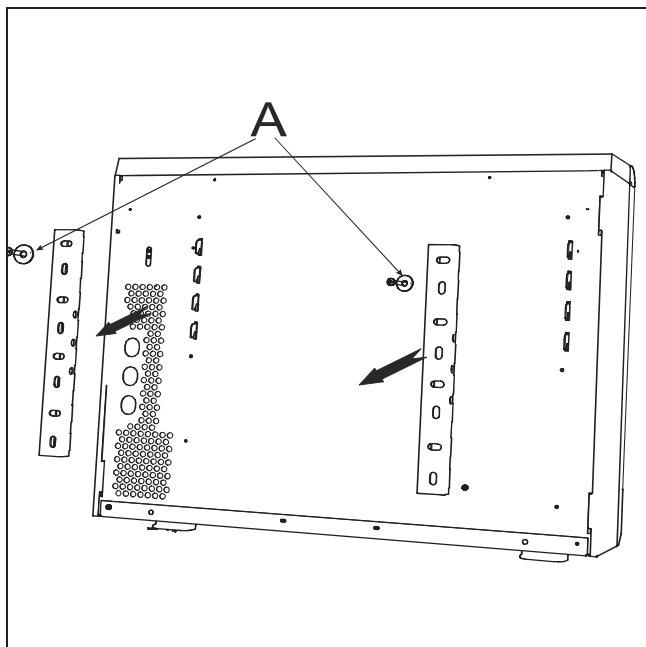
Remove the storage heater from its packaging. Dispose of the packaging material properly. Unscrew wall bracket from rear wall. To do this, remove the two safety screws for transport (A).
